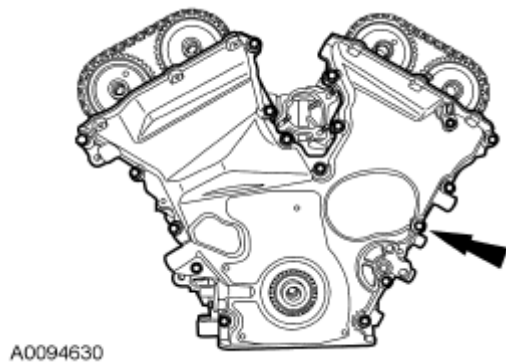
Locating Front Cover Bolts & Stud Bolt
